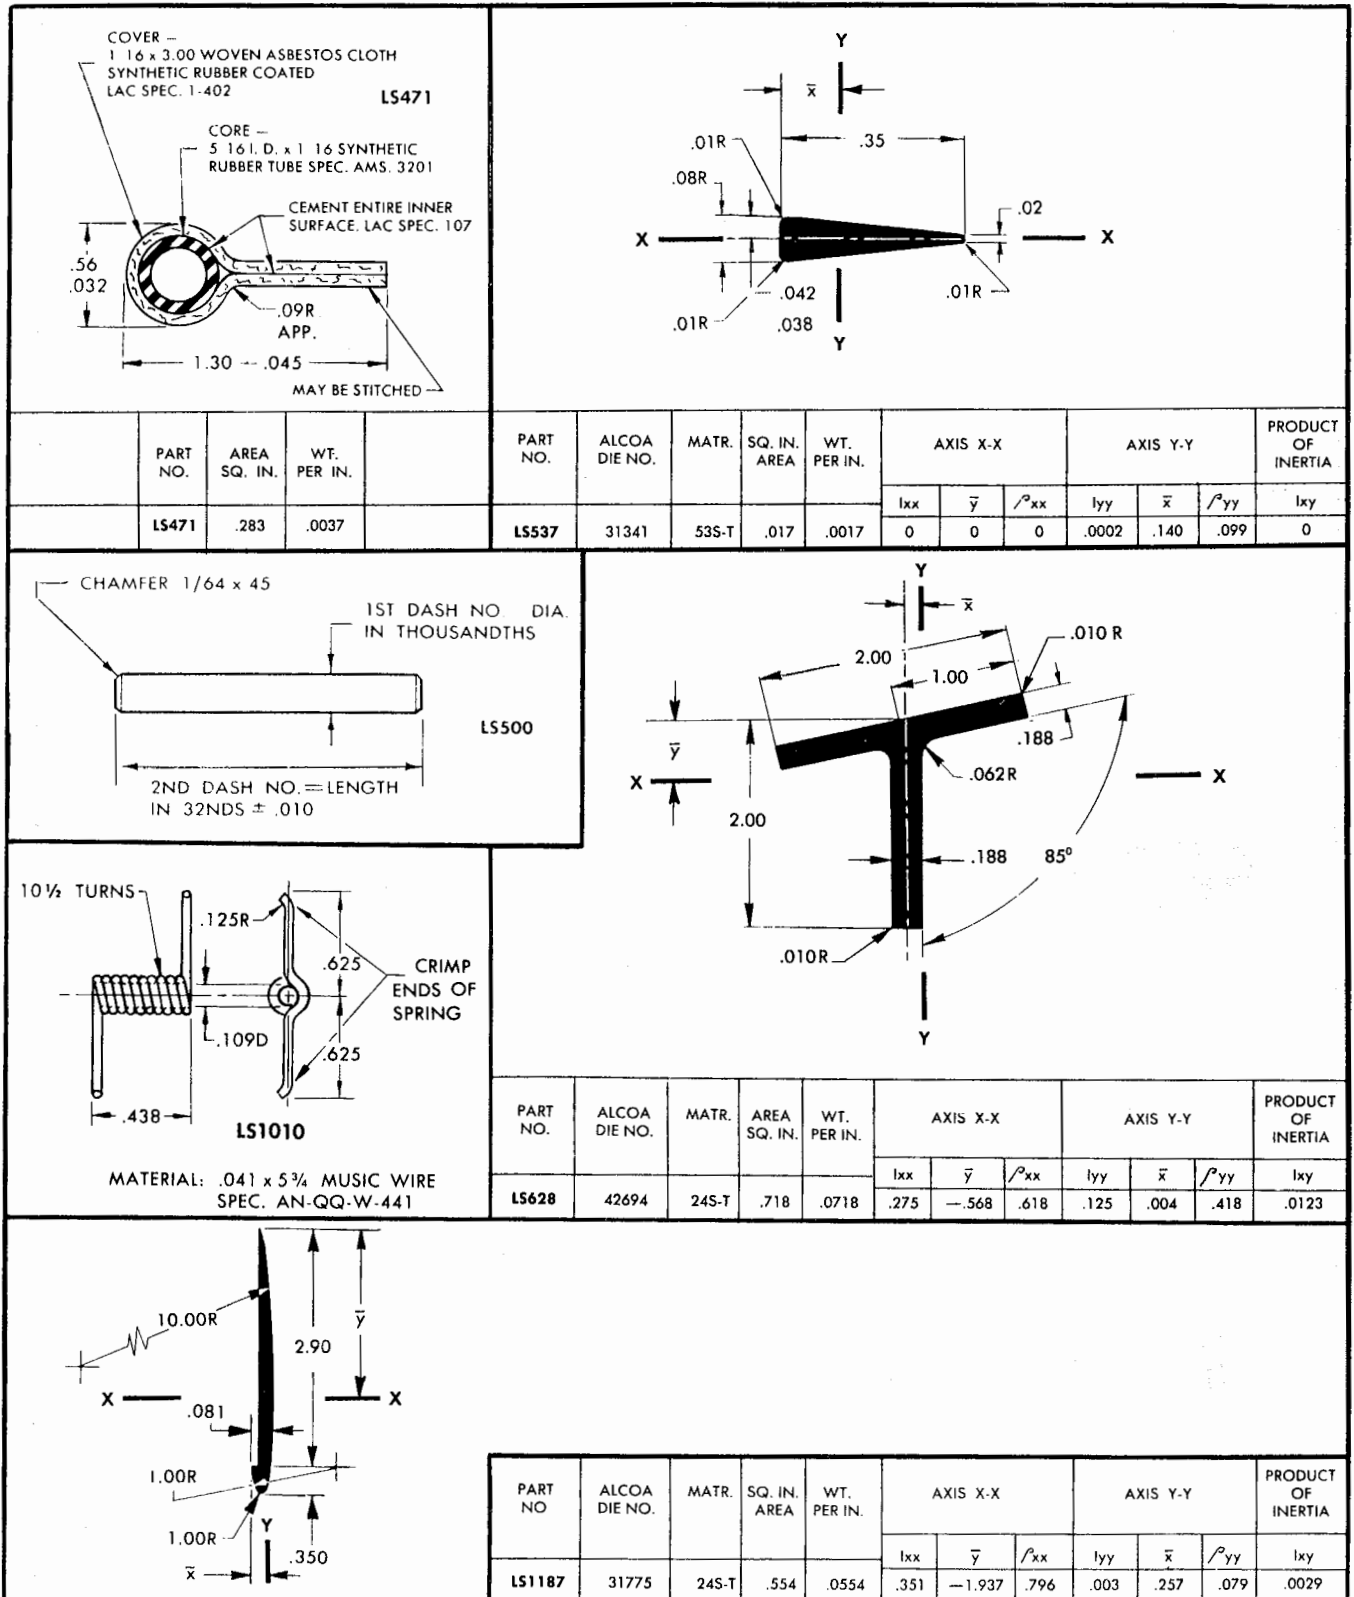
(Sheet 14 of 17 Sheets) — Extruded Standards
